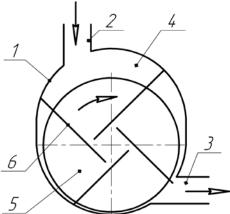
Scheme vacuum pump working chamber oval: 1 - the case; 2 - inlet pipe; 3 - outlet; 4 - working chamber; 5 - rotor; 6 - blade.
